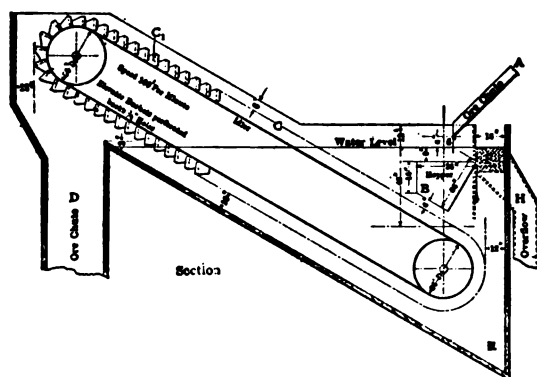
SEPARATOR FOR REMOVING WOOD. SECTION.
